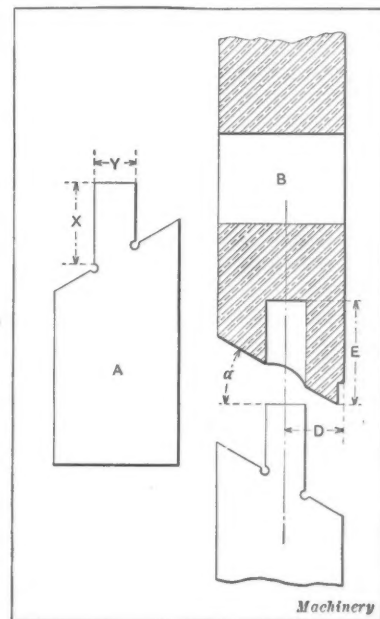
Flat Gage for measuring Milled Slot in Ring
